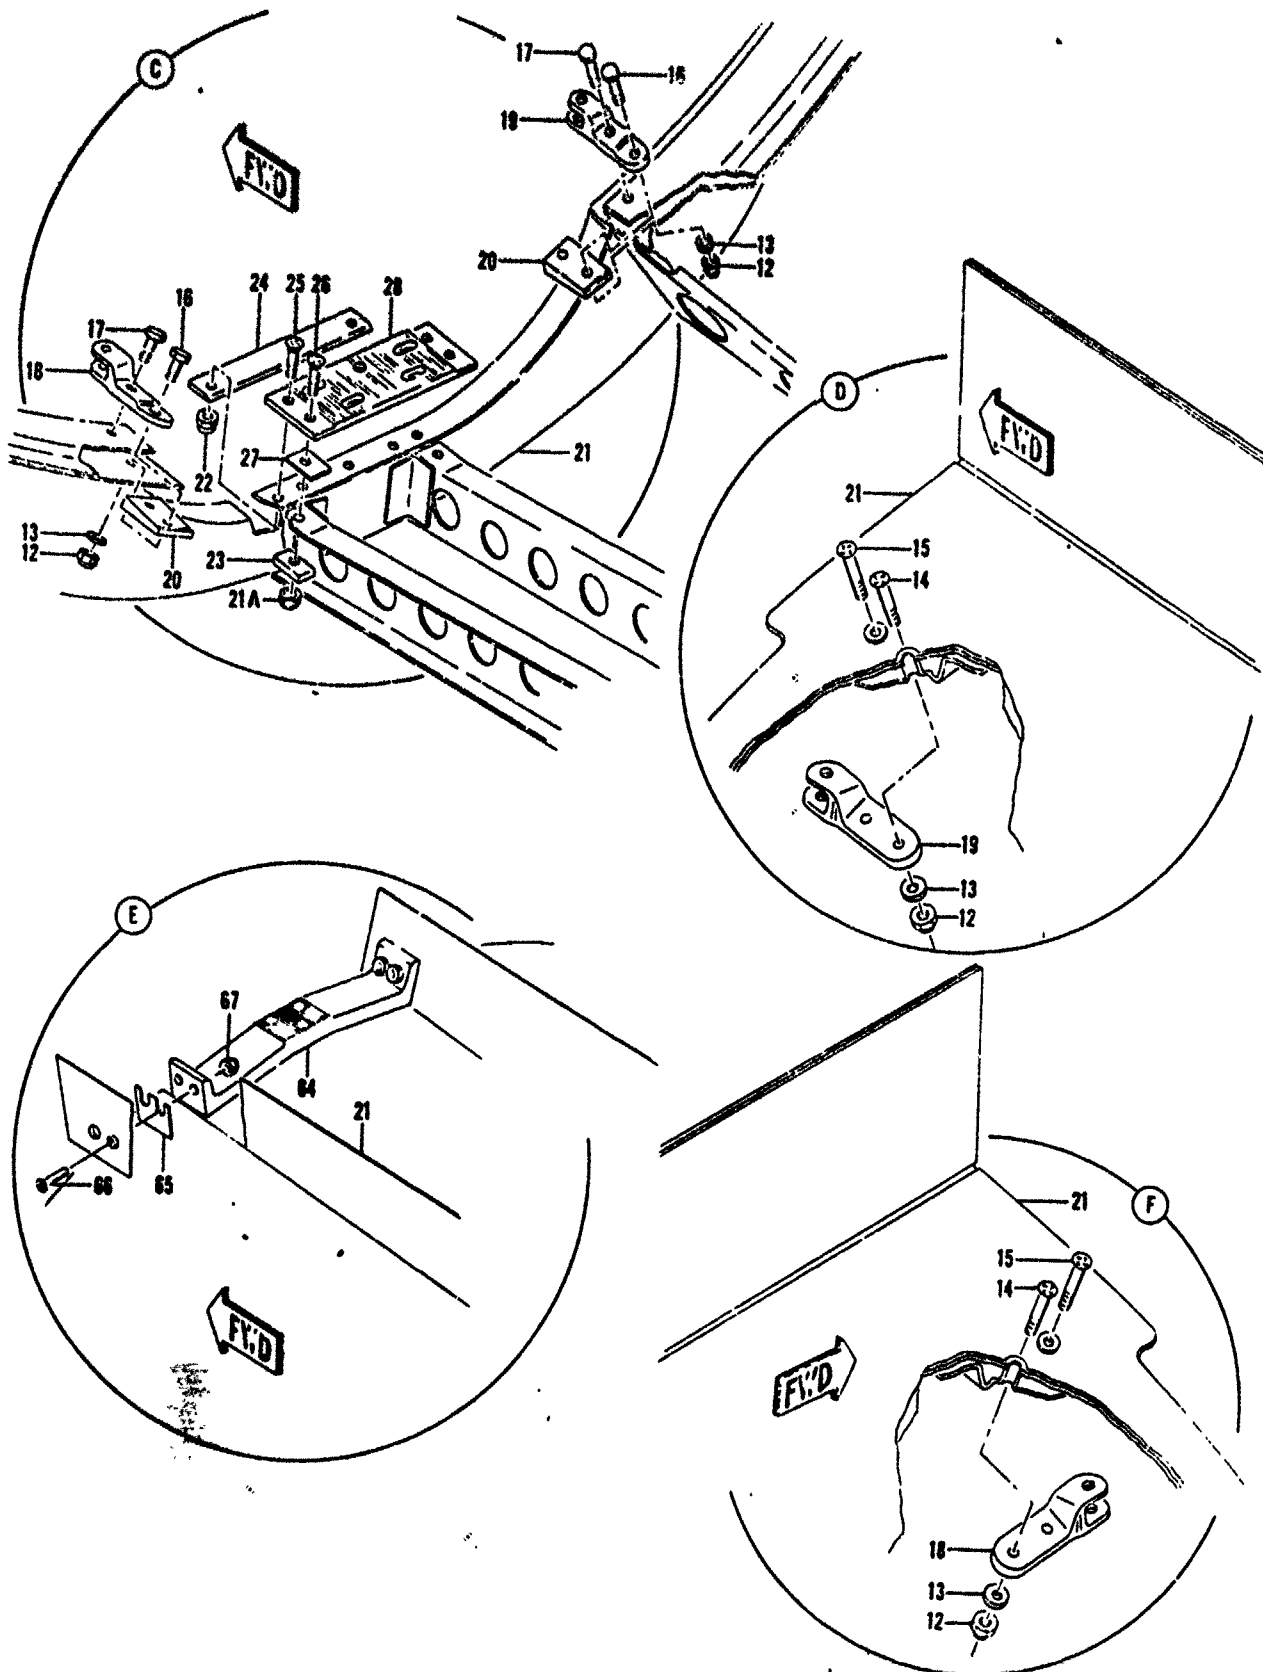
Aft Thrust Reverser and Sleeve Assembly (Sheet 2 of 3)
